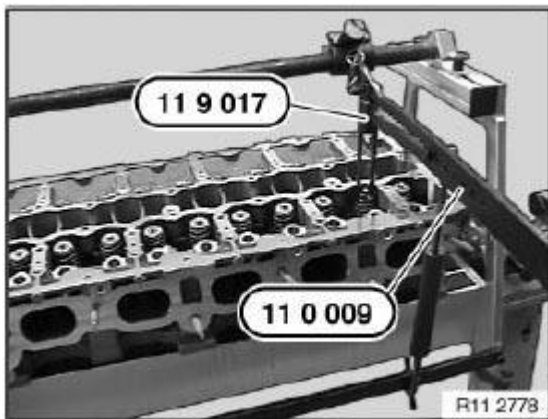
Pressing Valve Spring Down On Spring Retainer Using Special Tools 11 0 009 And 11 9 017
